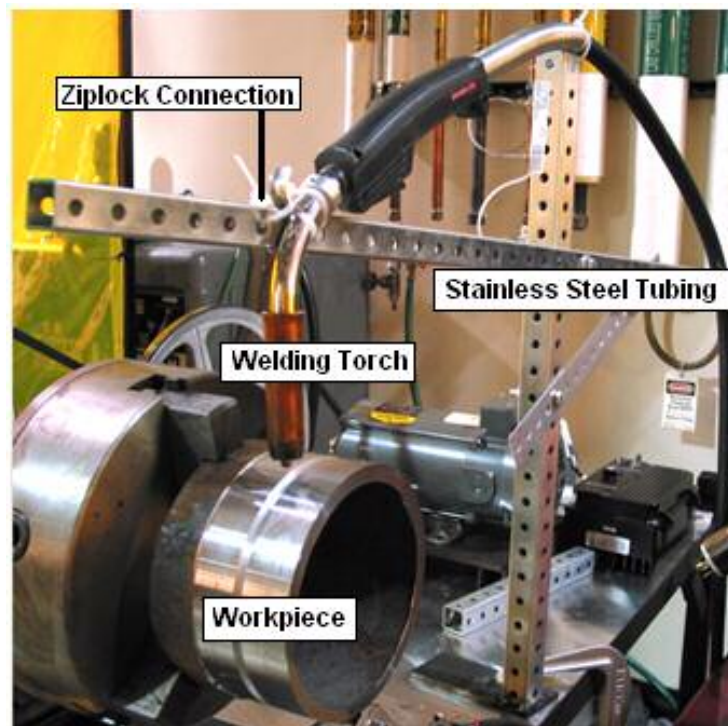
Welding torch holder made of stainless steel tubing: ziplock connection, welding torch, stainless steel tubing, workpiece
